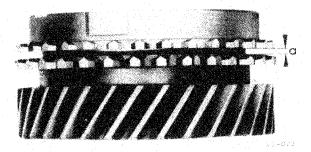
Synchronizer rings 3rd/4th gear, checking
